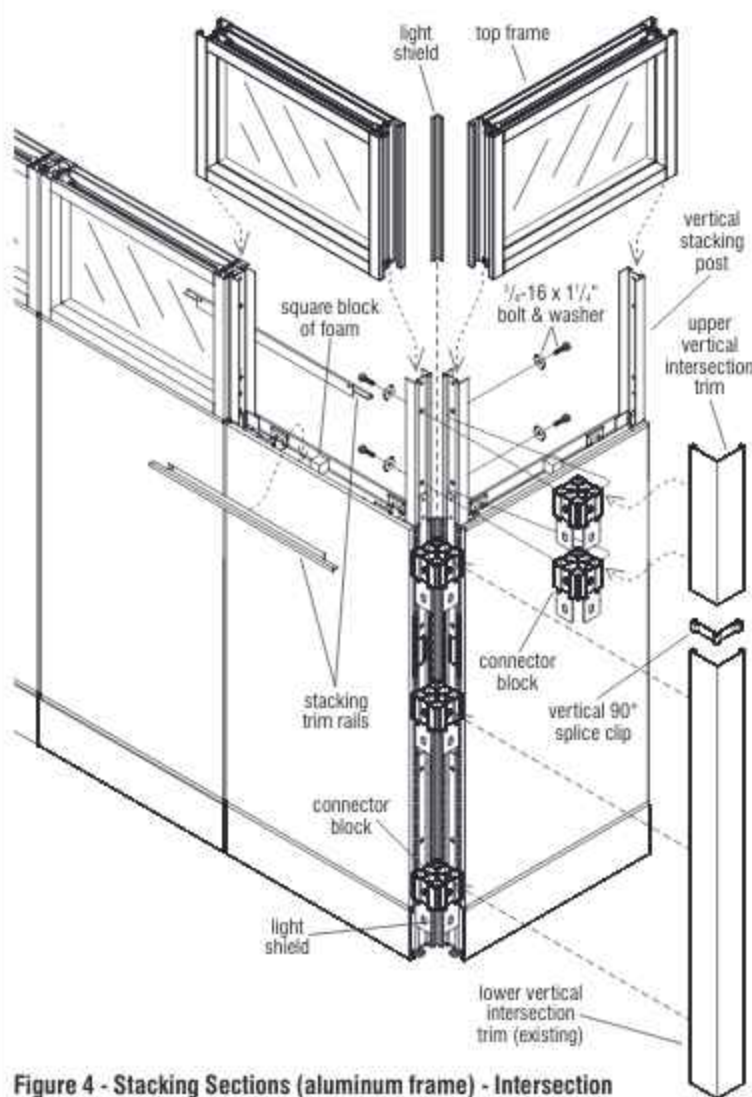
Stacking Sections (aluminum frame) - Intersection
